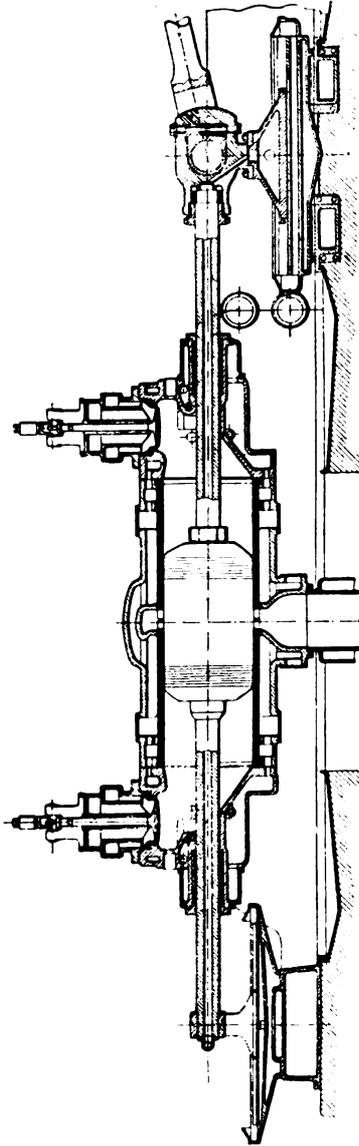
Section of Cylinder, Koerting type, Siegenger Maschinenbau.
